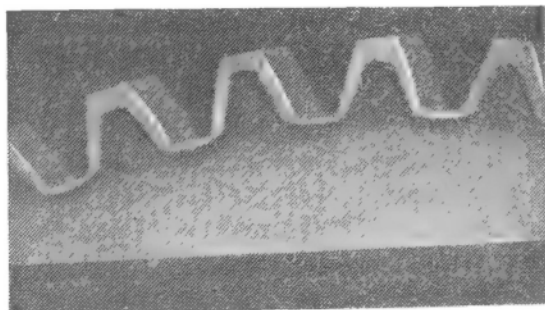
Macrostructure of a gear wheel upon induction hardening
